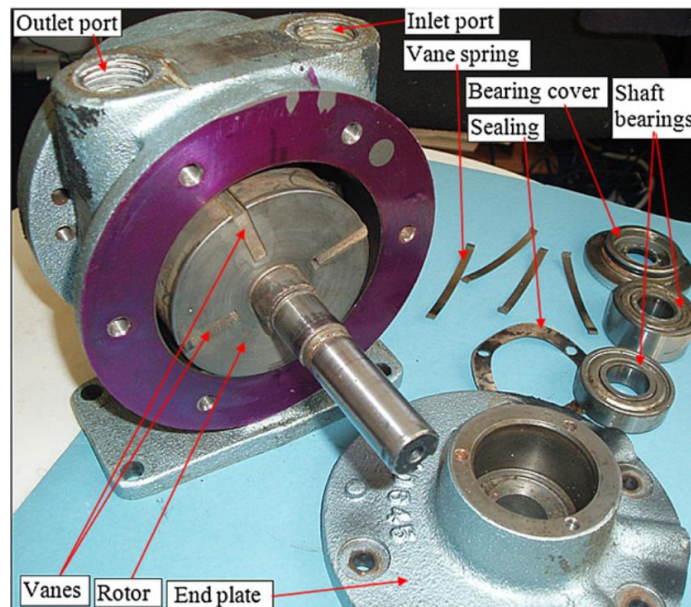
Photography of a rotary vane expander with the identification of its main components [22].
